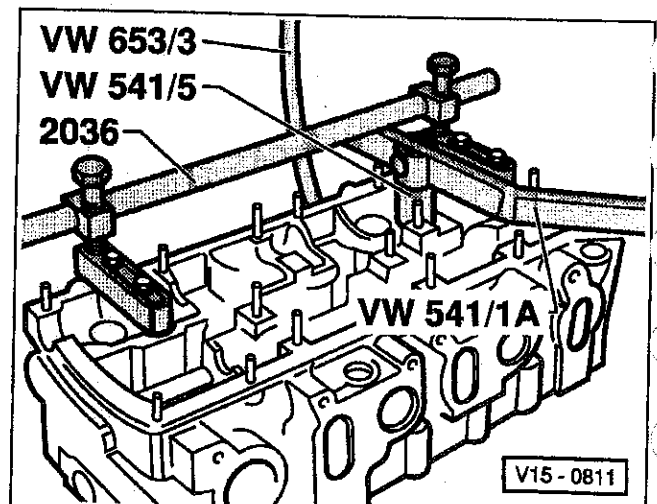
Valve spring compressors being used to remove valve springs. Numbers identify Volkswagen special tools designed for use on Volkswagen engines. (VW 653/3 is air hose adapter for spark plug hole.)
